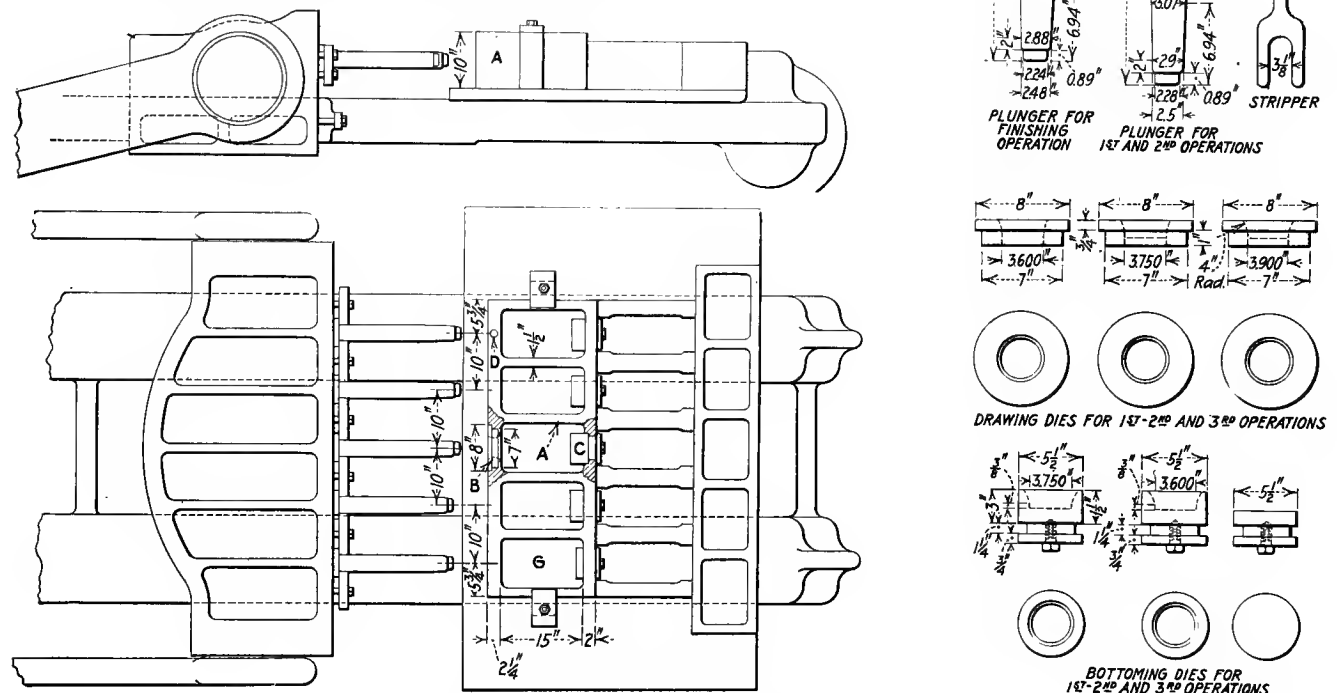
BULLDOZER EQUIPMENT FOR FORGING SHELLS
